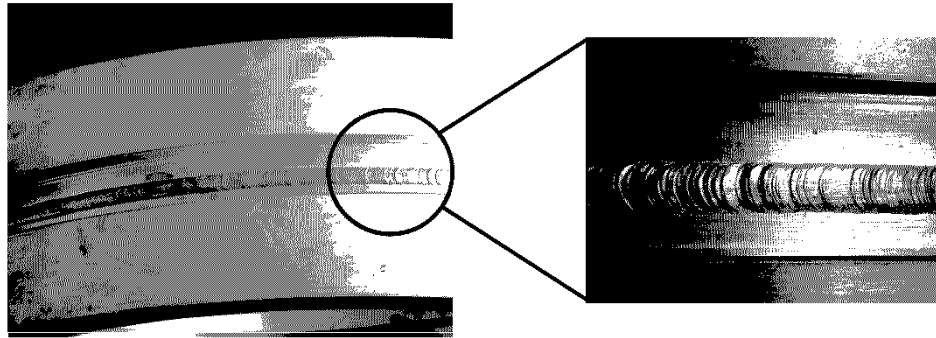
MIG-welded magnesium rim consisting of two half shells.
